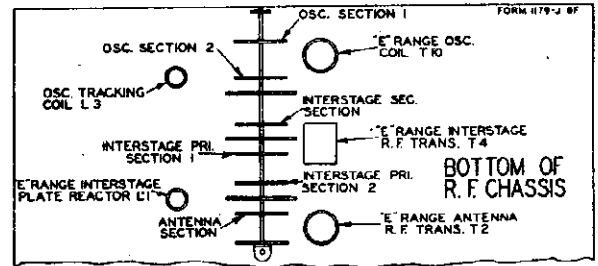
Bottom View of Chassis Showing Coil and Switch Section Location
